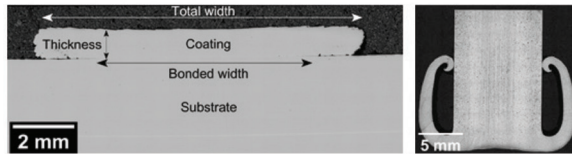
Cross-sectional view of deposit and consumable rod for single layer friction surfacing of 304L stainless steel
